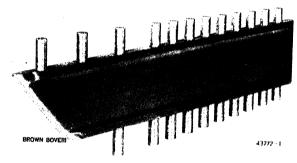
Blade of scavenging blower of Brown Boveri design with studs for rivetting, milled out of the solid blade.
